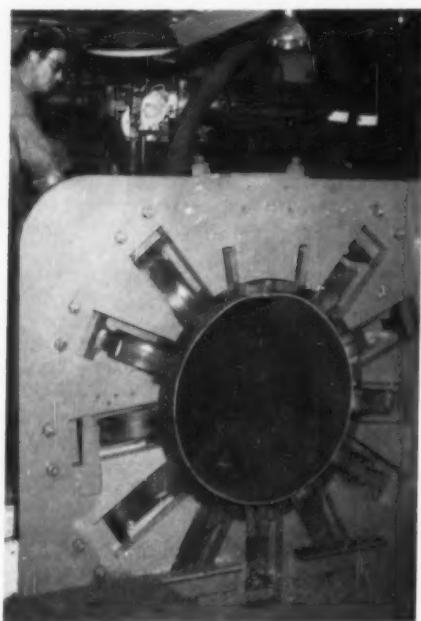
Cage for holding pipe during OD welding by the submerged-arc process, National Works, McKeesport, Pa.
